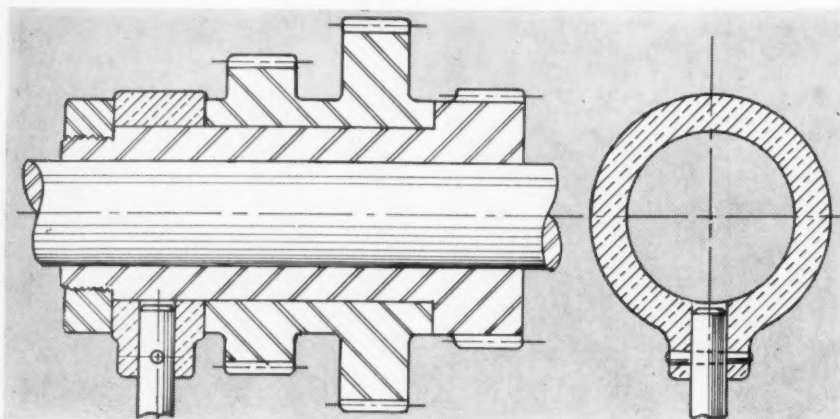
The 360-degree shifting shoe, or ring shifting shoe, shown in this particular cross-sectional sketch can be applied to cluster gears as well as to clutch shifting mechanisms.
